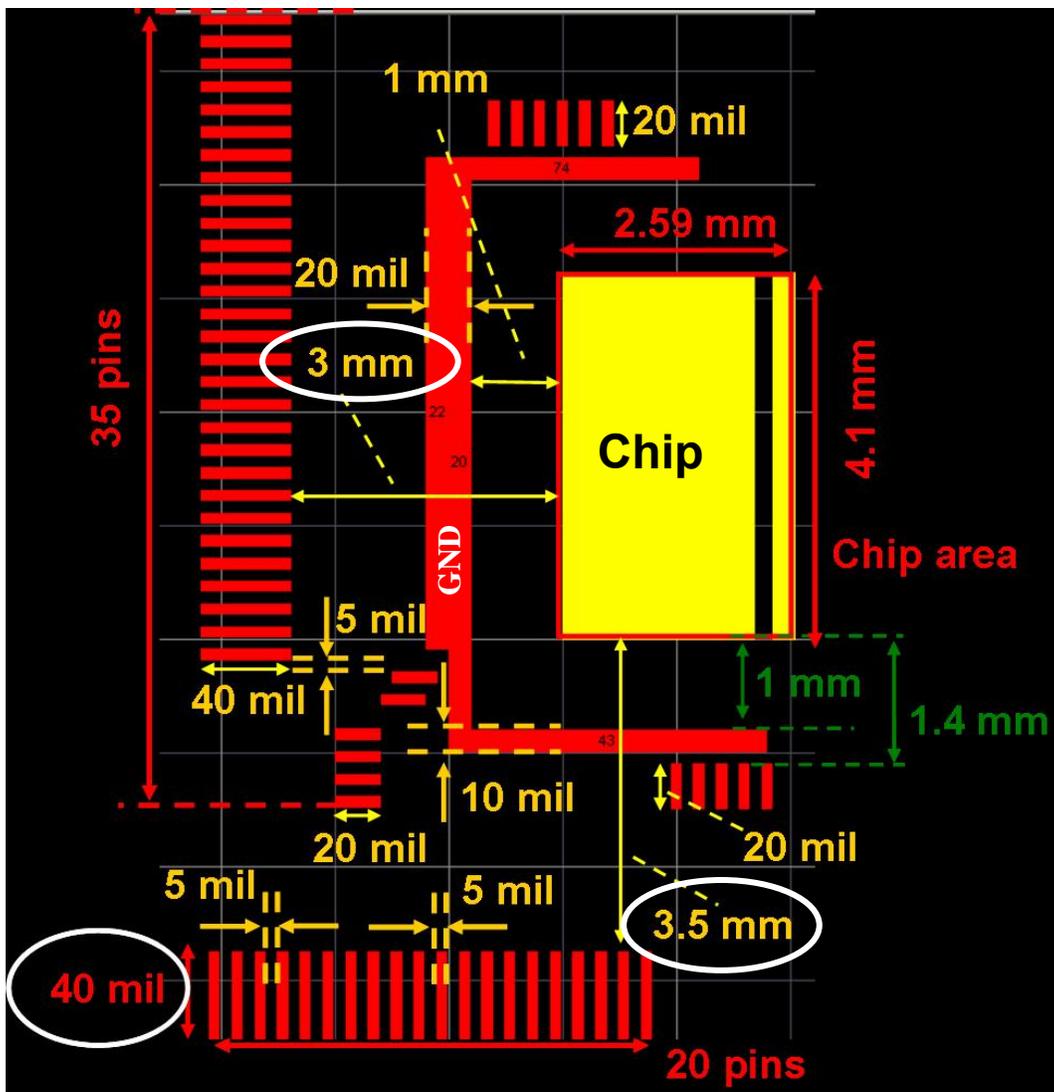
Double row bonding design with a proper finger length on the PCB side.
